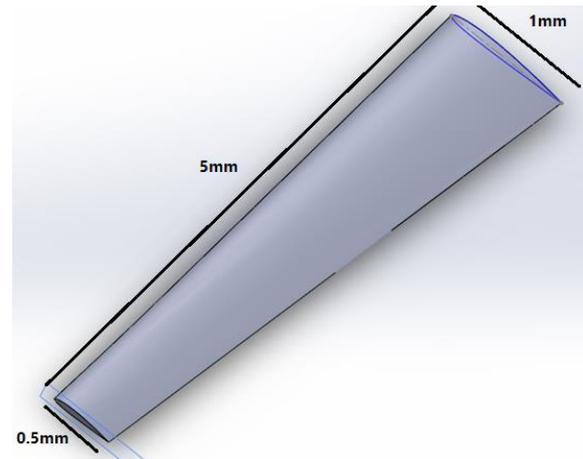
Side view of a designed wing with dimensional isometric projection.
